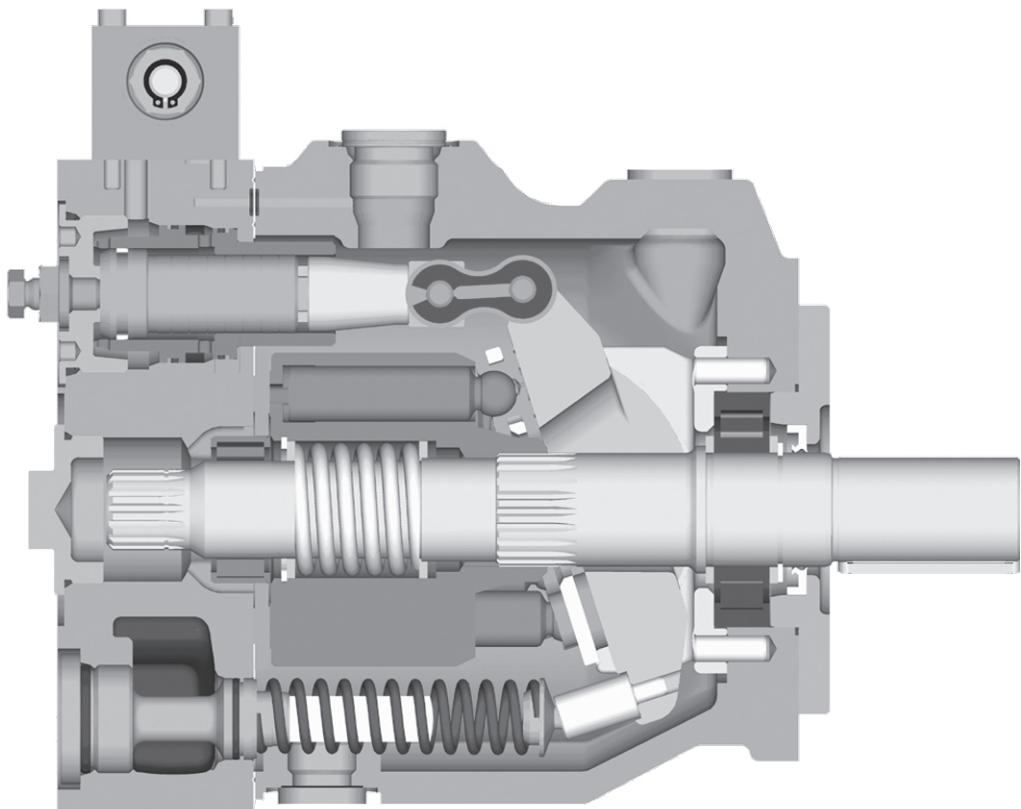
B Section view of an axial piston pump (Courtesy of Parker Hydraulics)
